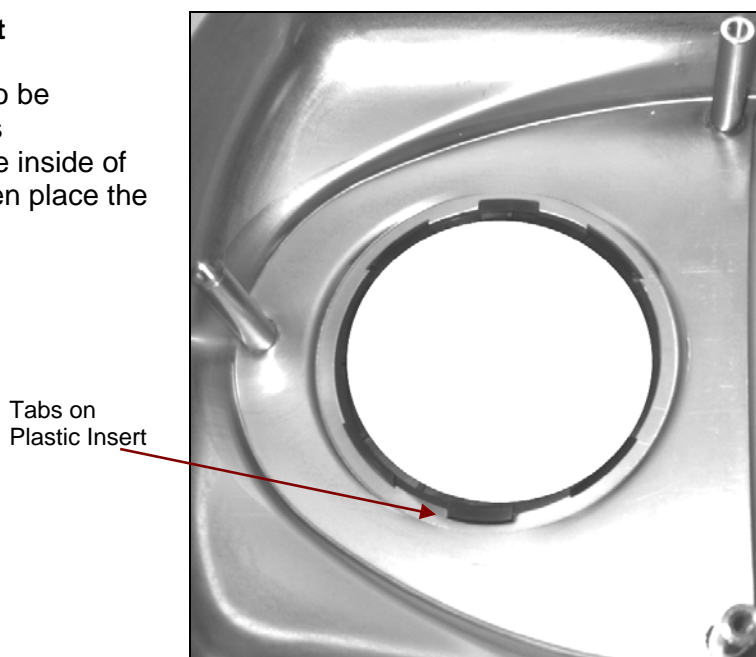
Plastic Insert, viewed from inside Top Housing.
